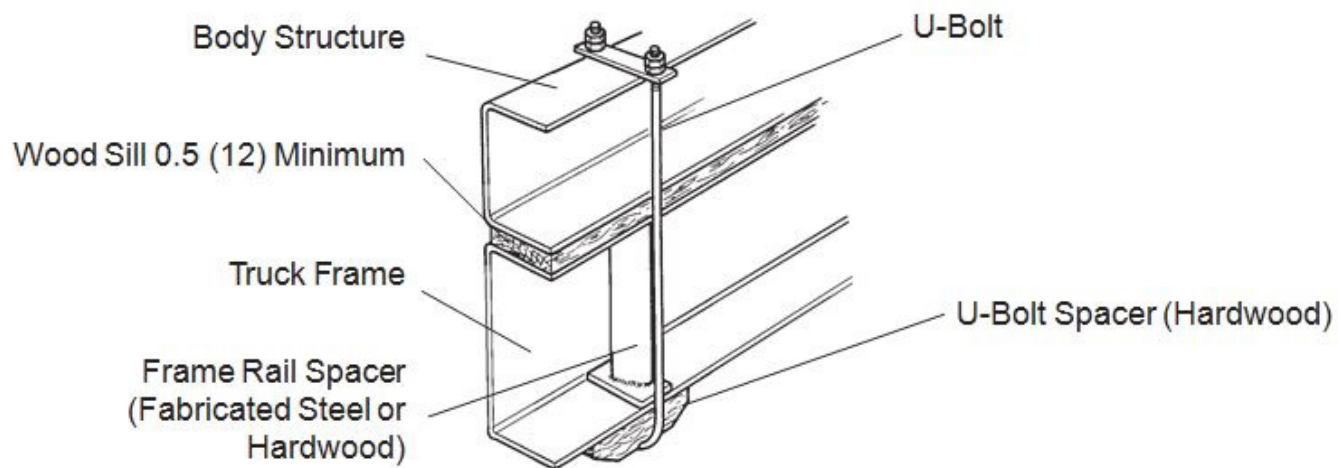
Acceptable U-Bolt Mounting with Wood and Fabricated Spacers
